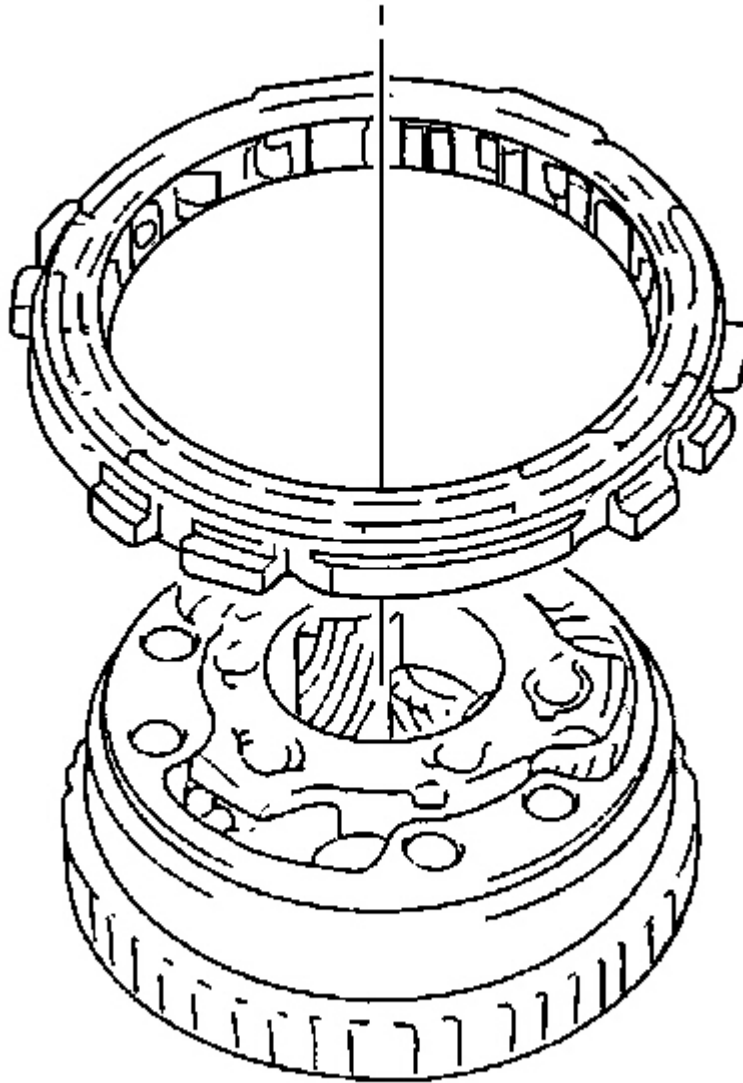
No. 2 One Way Clutch, Planetary Gear & Remove Anti-Rattle Clip
